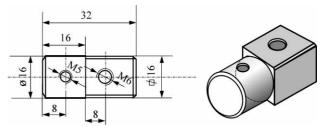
Steel insert on top of the tube for joining the upper holder.
